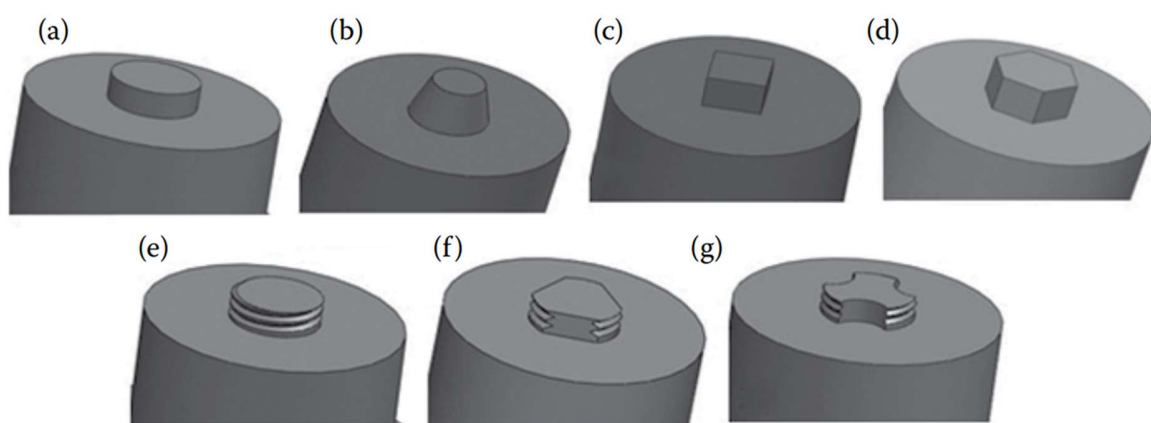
11. Different FSW tool pin profiles: (a) cylindrical, (b) tapered cylindrical (i.e., frustum of a cone), (c) square, (d) hexagon, (e) threaded cylindrical, (f) threaded cam, and (g) threaded tri flute.
